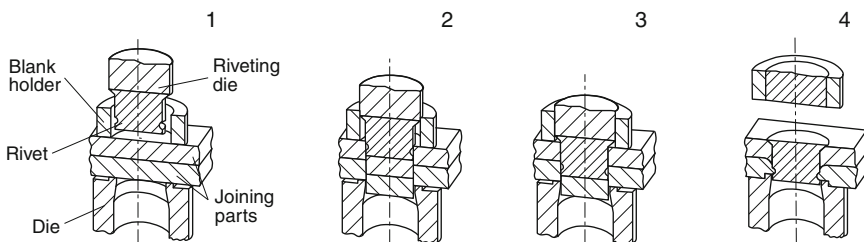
Process steps for punch riveting with solid rivets [HAHN96]
